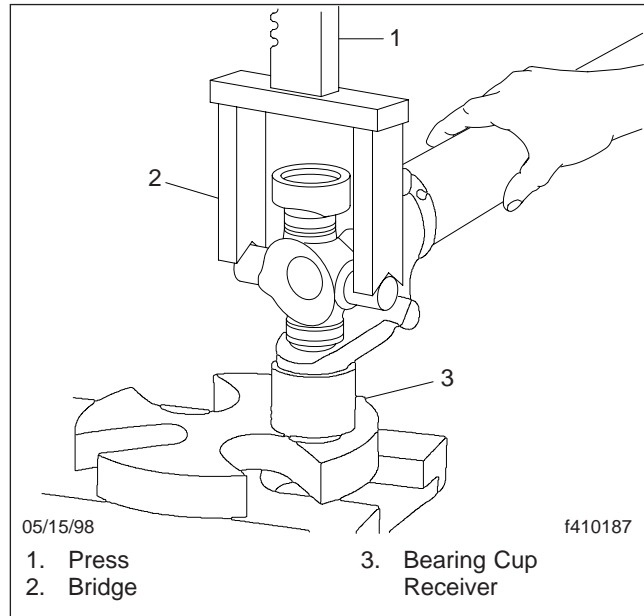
, Removing Bearing Cups from an RPL U-Joint
